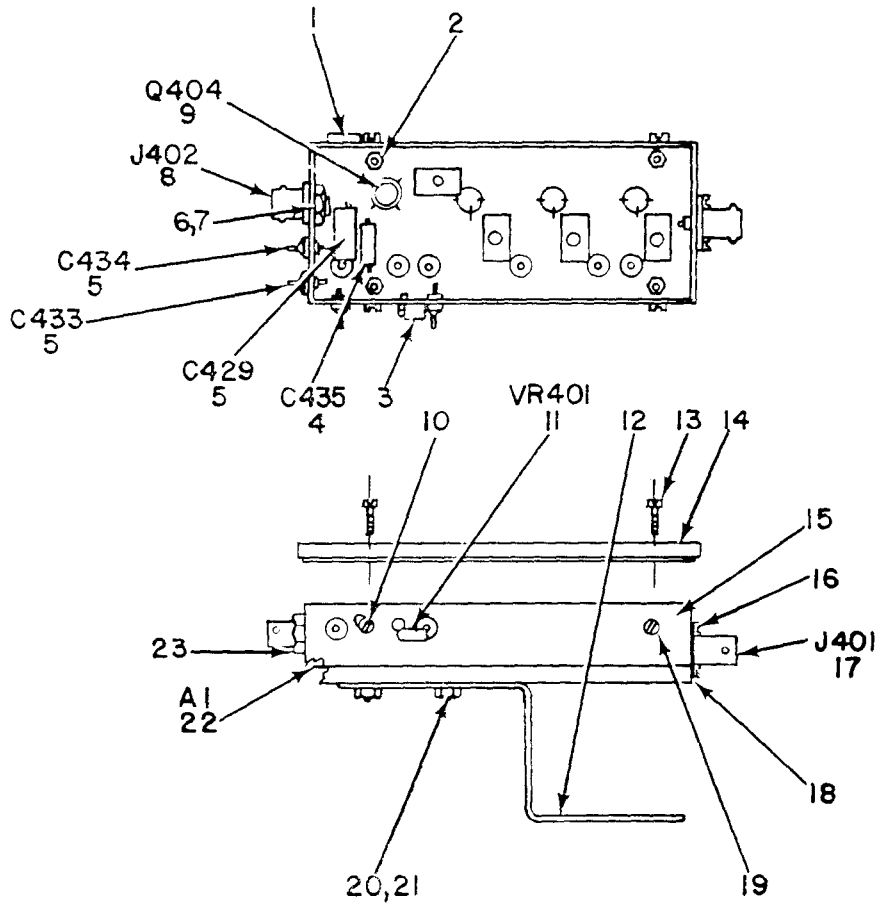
Circuit Board Assembly (A3A1) (Sheet 1 of 2).
